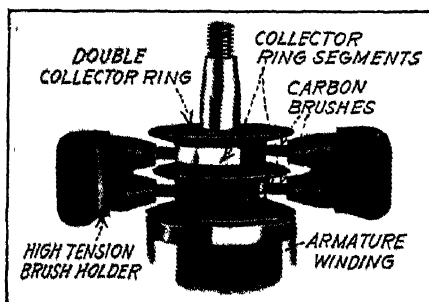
Arrangement of high-tension slip ring and brushes on Bosch type NU4 armature.
